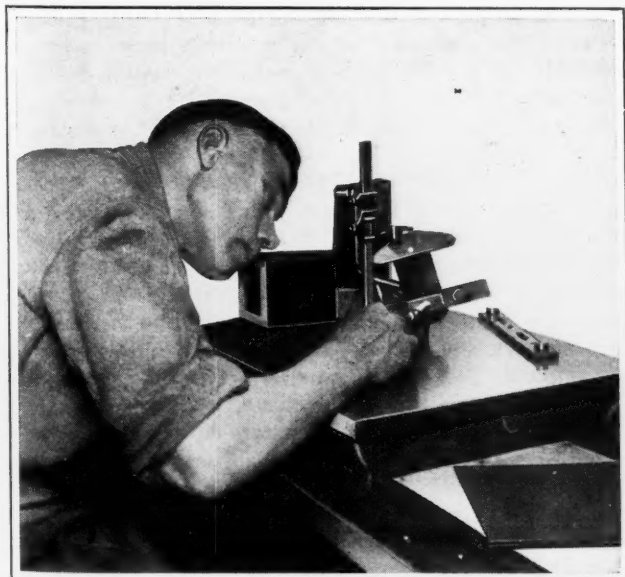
Checking Another Dimension after Fixture has been turned on its End
